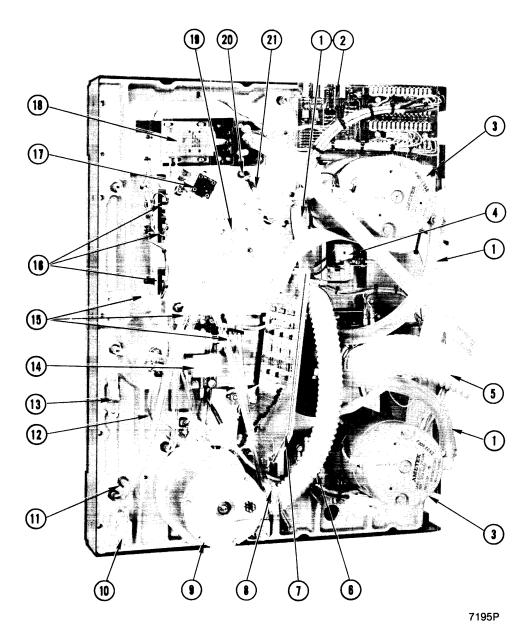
T1000 and FT1000 Series Photo Parts Index, Rear View
